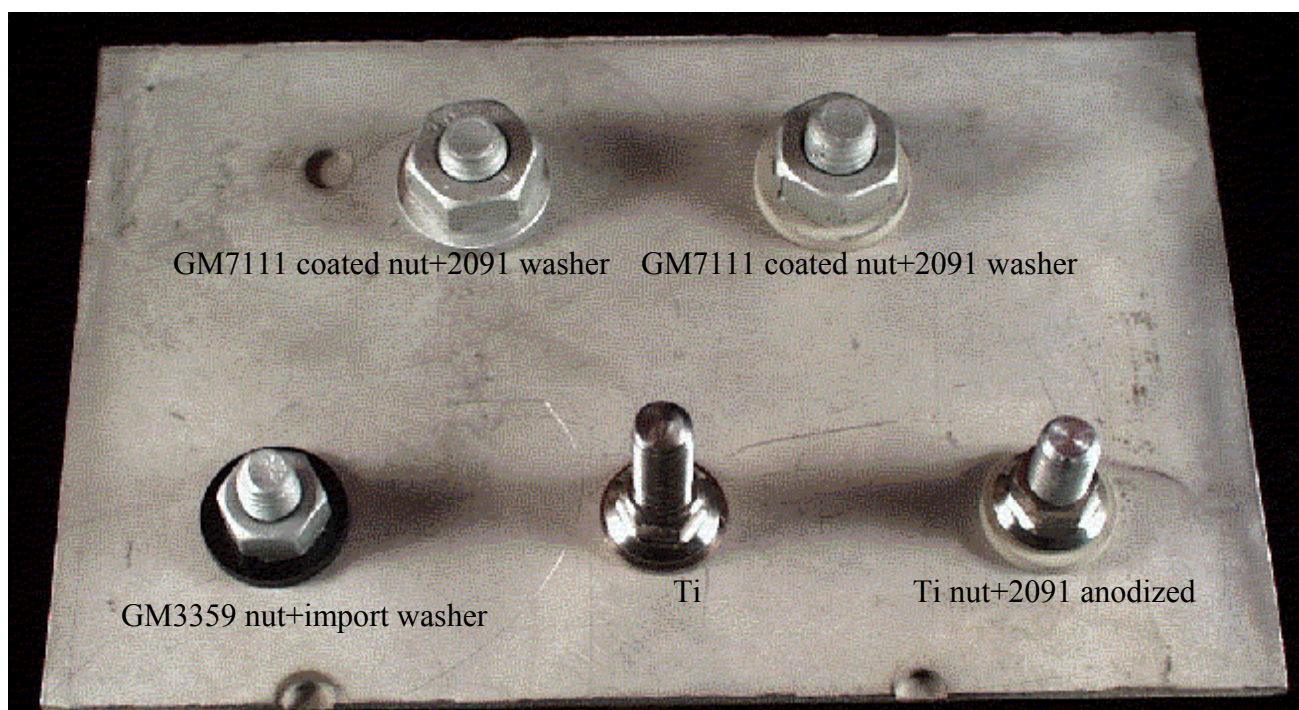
Layout of the M8 and M10 bolts in a 4 in. by 6 in. test plate
